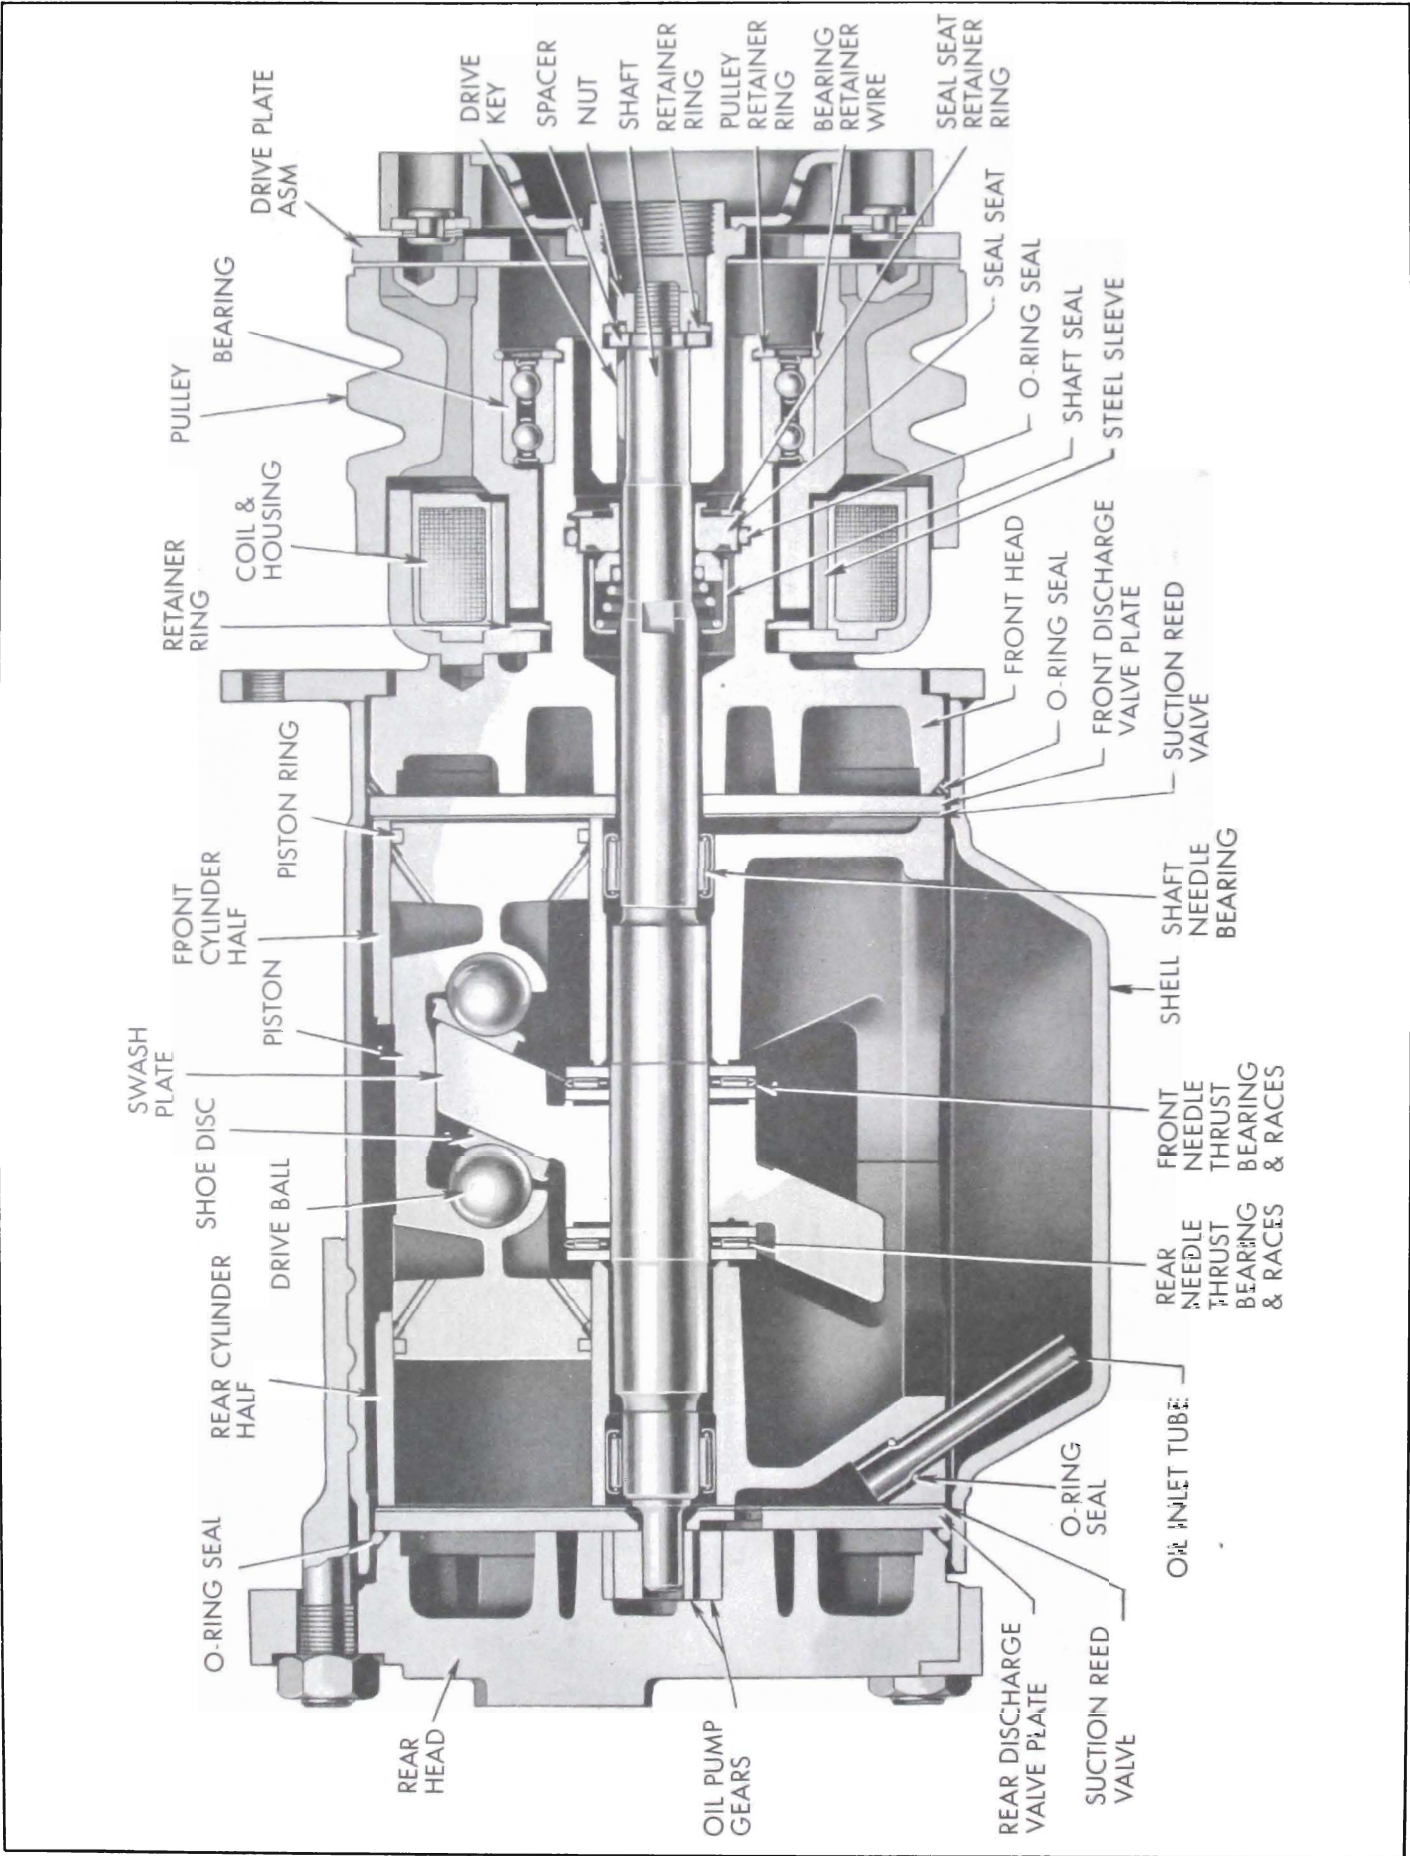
Sectional View of Compressor - 4600, 4700 and 4800 Series
